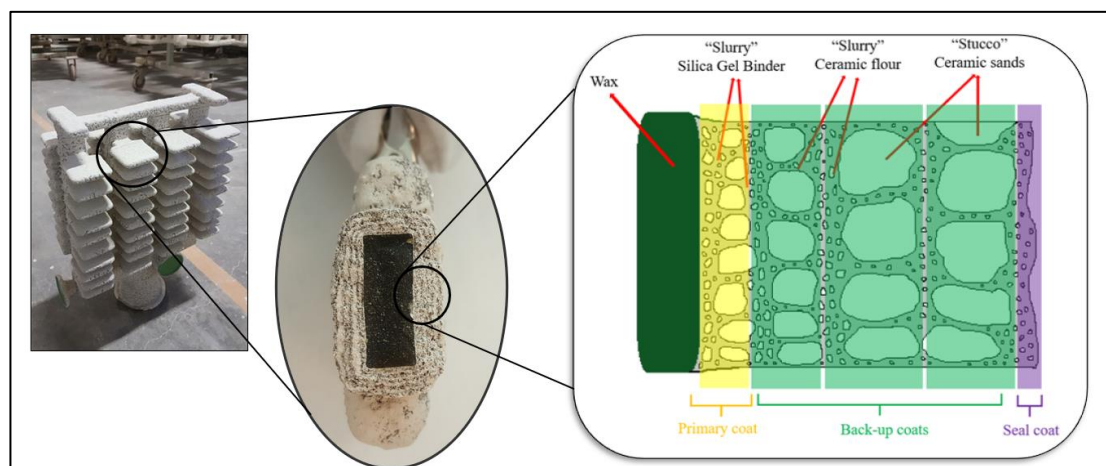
1 Schematic of a ceramic shell mold for investment casting.
